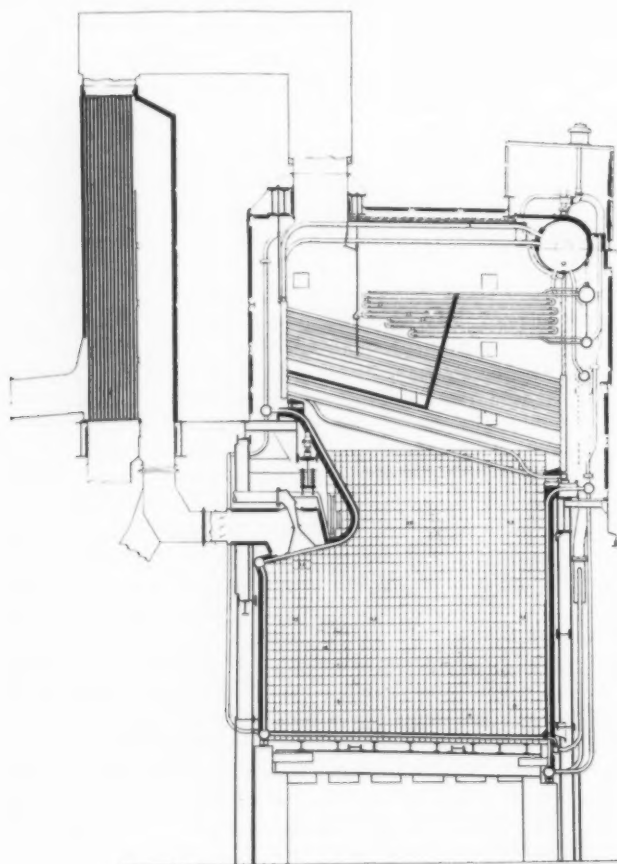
SLAG-TAP FURNACE IN WHICH WALLS AND FLOOR CONSIST OF BLOCK-COVERED WATER-COOLED TUBES
